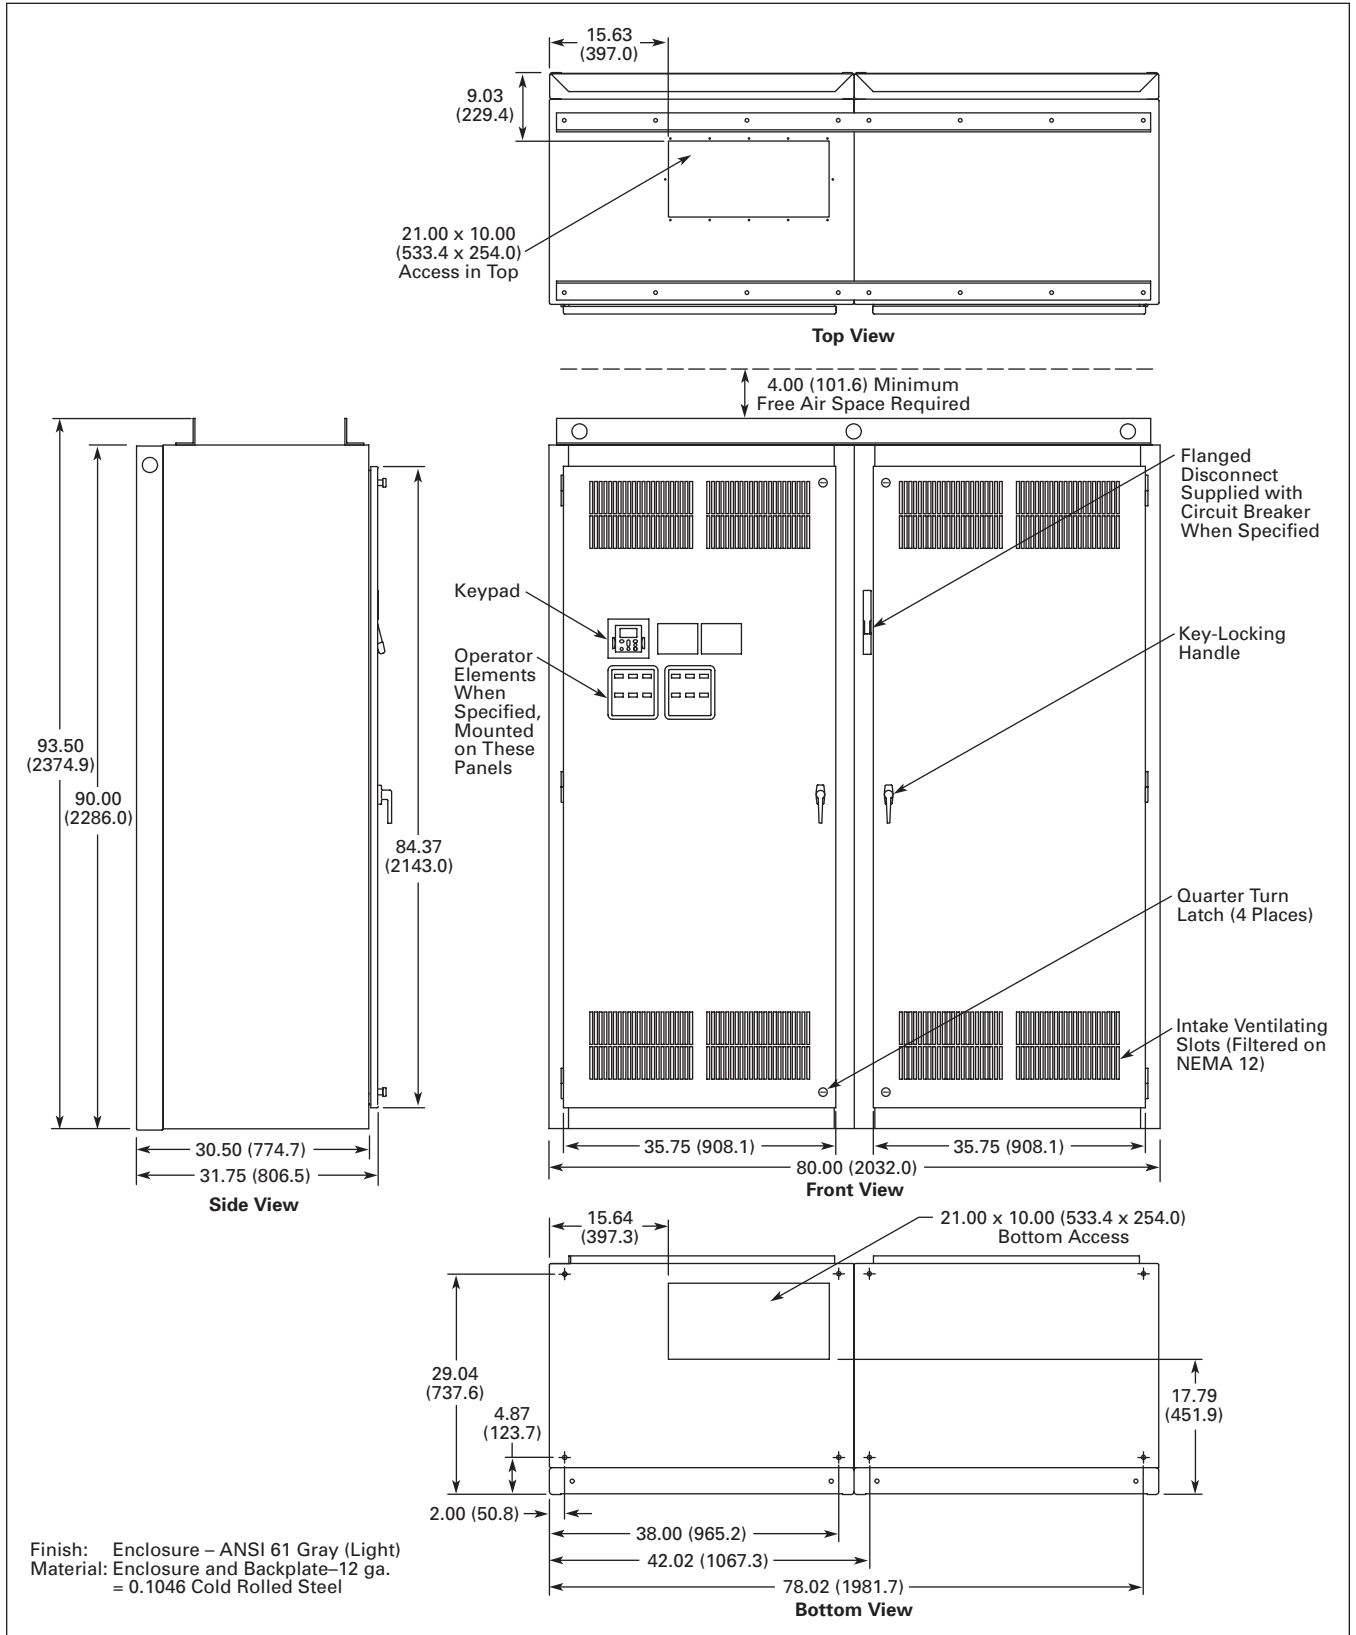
500–600 hp I_L and 400–500 hp I_H—Approximate Dimensions in Inches (mm)
